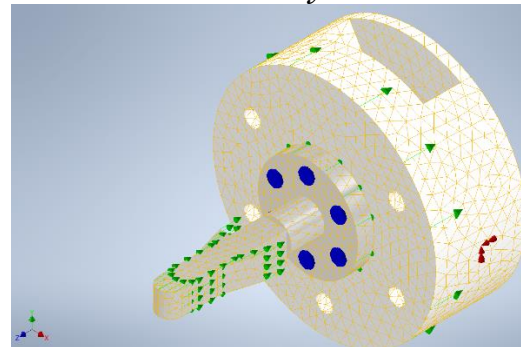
Specified constraints, loads, connections, and generated mesh for motor subassembly
